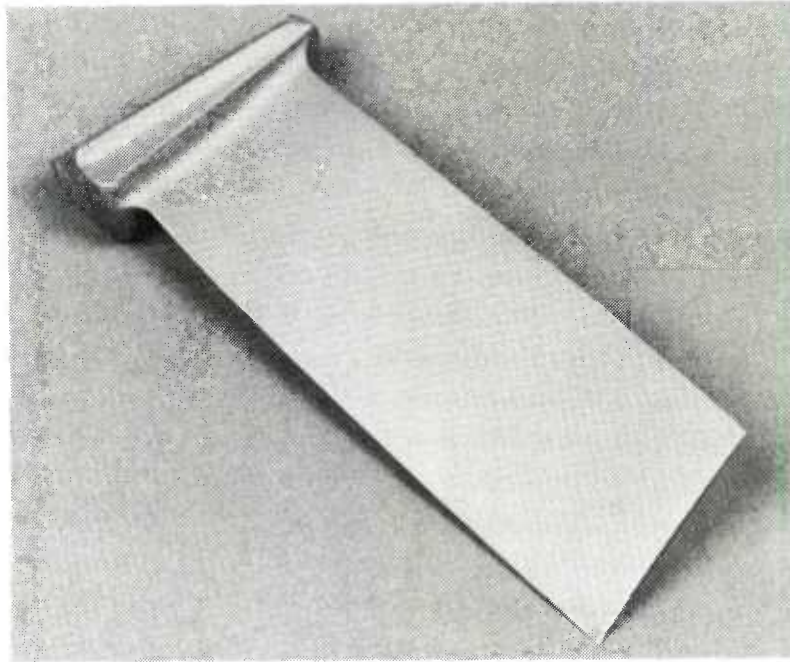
Close-Up View of a Finished Blade (#79-3873)
